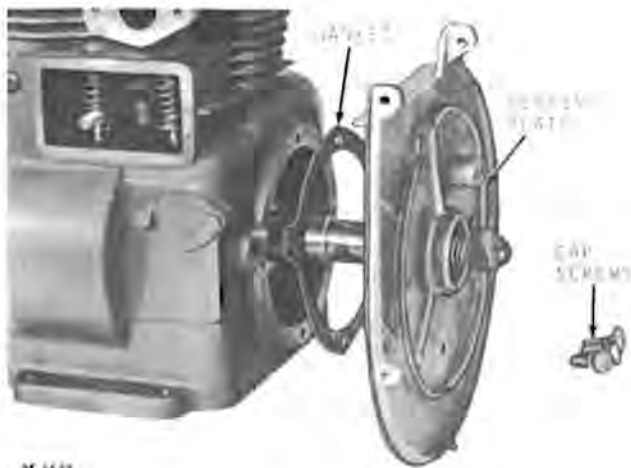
Installing Bearing Plate with Bearing on Cylinder Block
